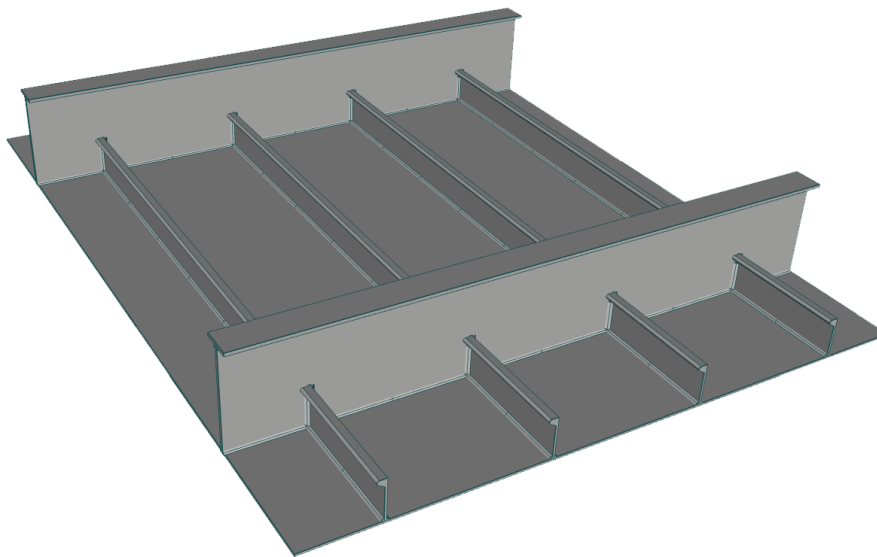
Studied stiffened plate, composed by two girders and four stiffeners
